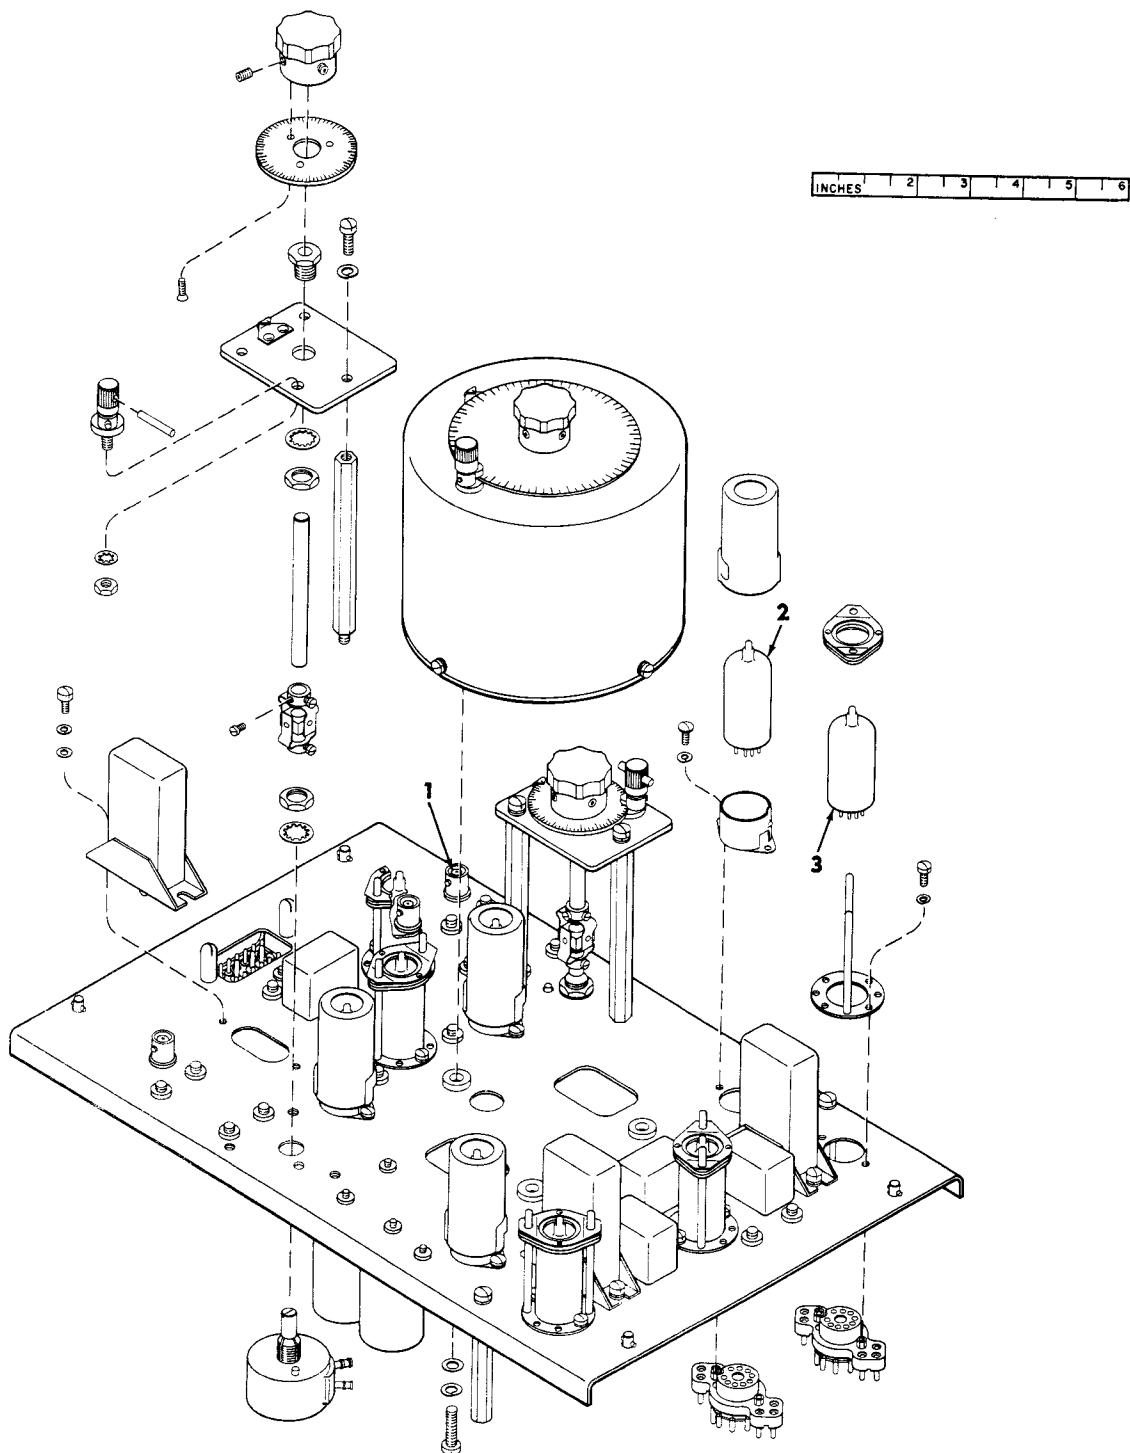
Generator, pulse O-300A/M (9000007) - partial exploded view
